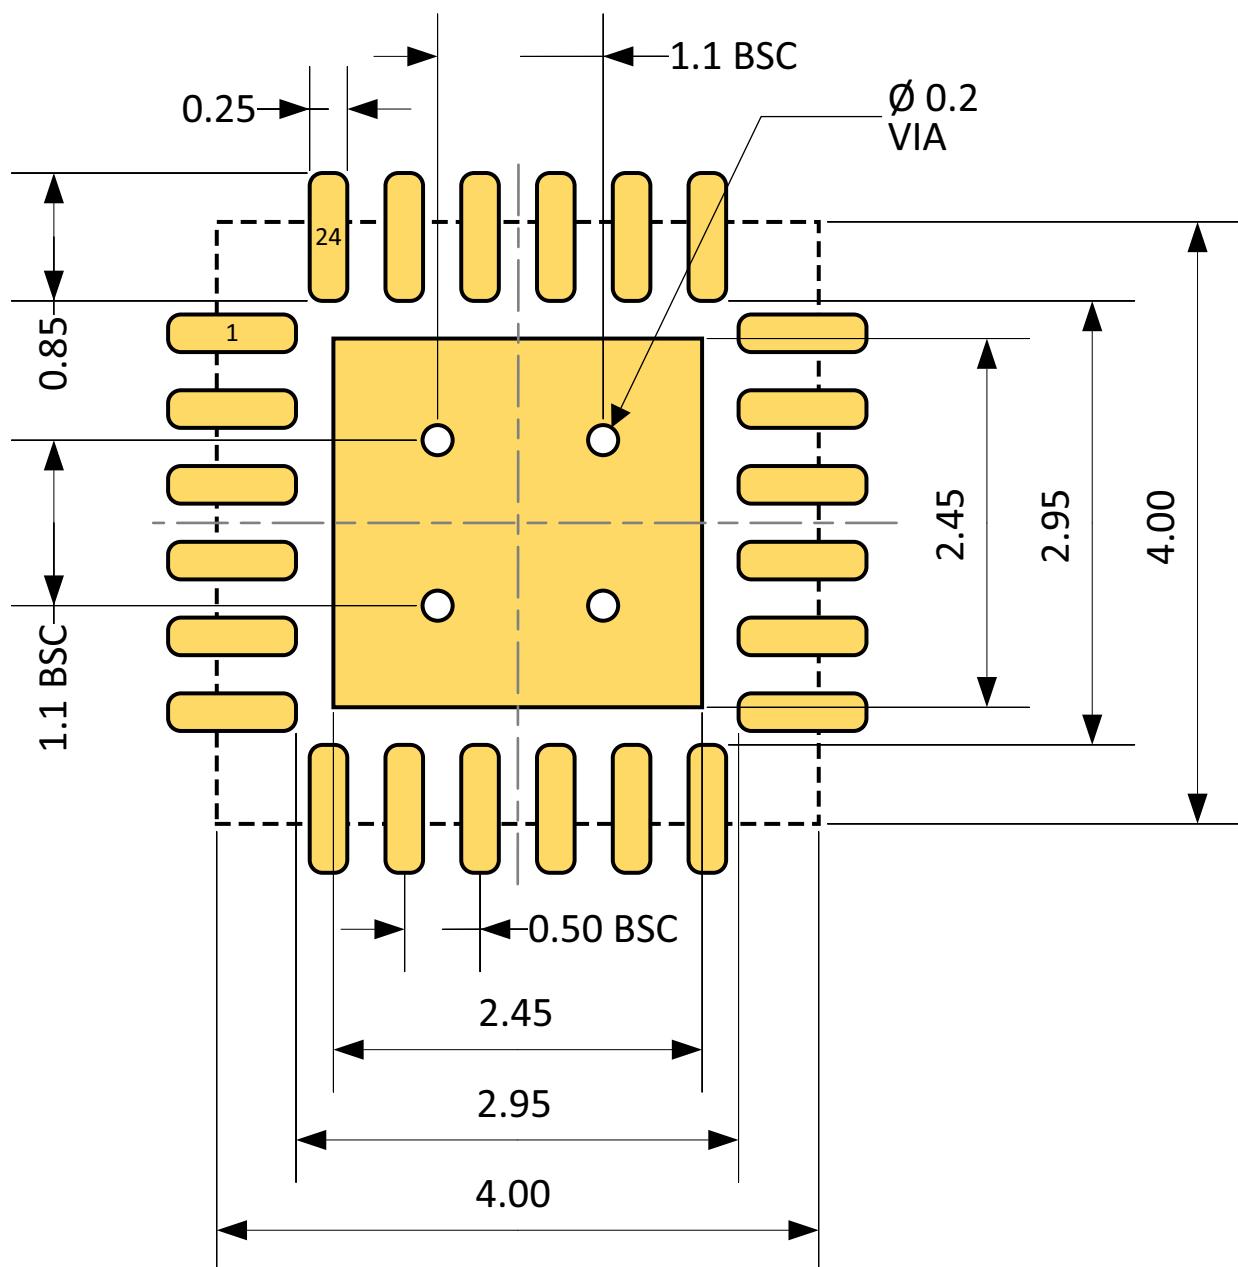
Recommended board layout for QFN24 package (all dimensions in mm)
